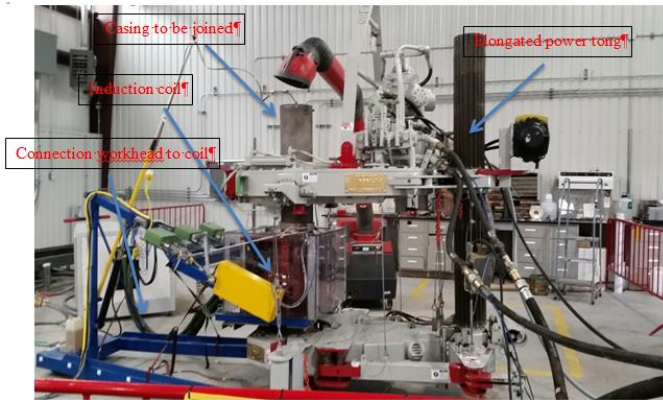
Laboratory prototype brazing machine showing induction heater and modified casing power tongs.
